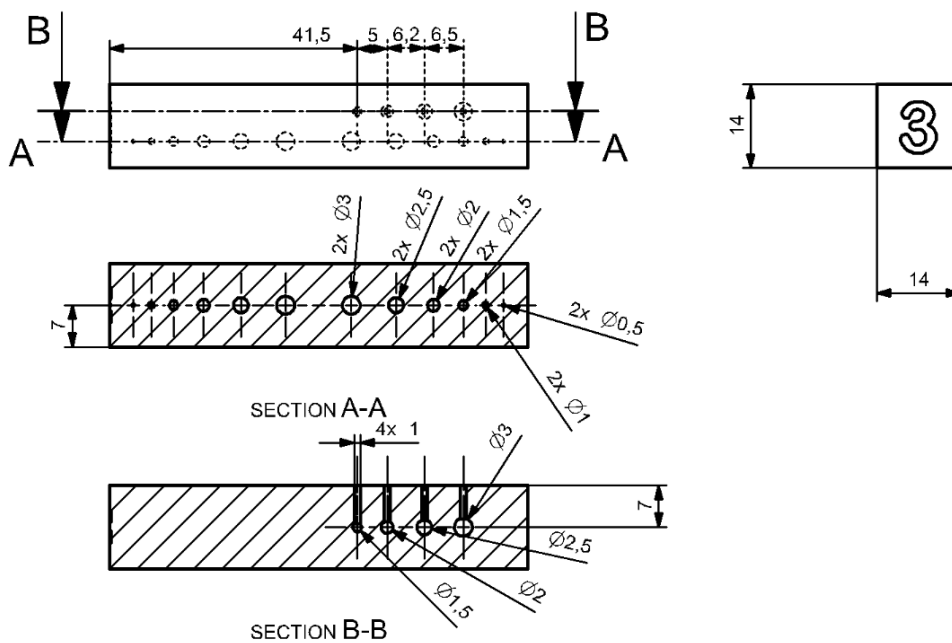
CAD drawing of IN 939 block 3 showing internal spheres.
